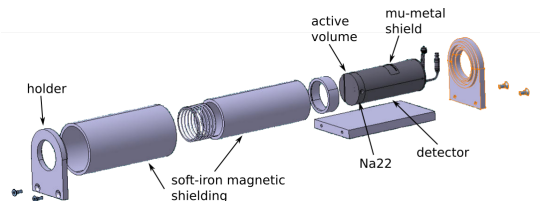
CAD model exploded view of the NCU detector, the double magnetic shielding and the front and back holders.
